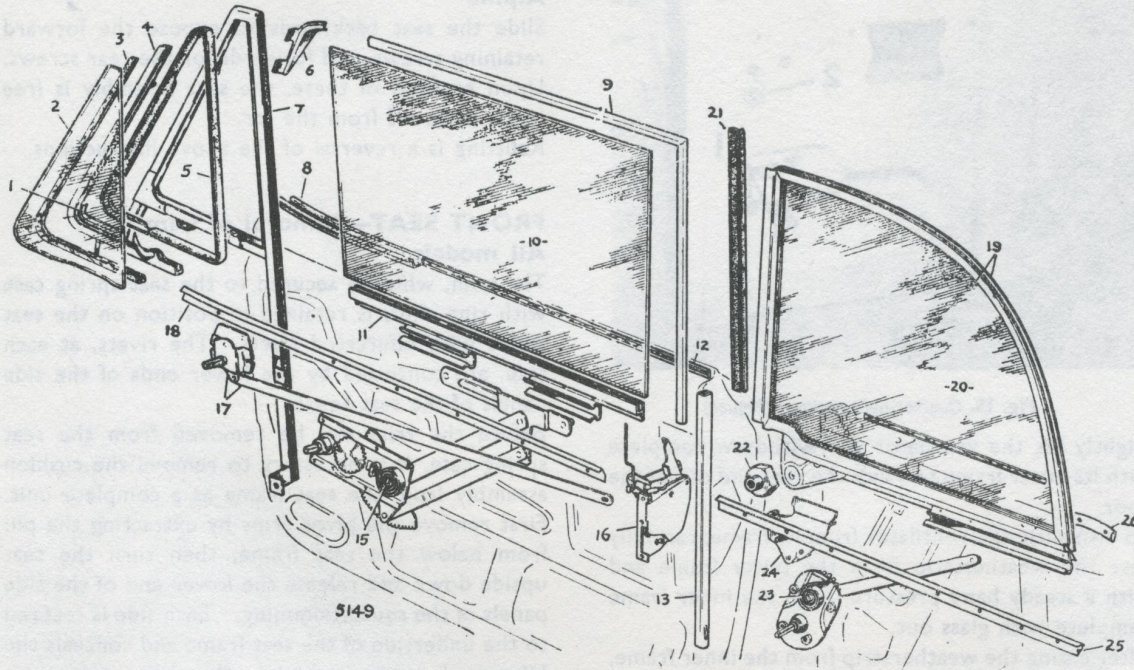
Door glasses and mechanism (Rapier Coupe)
